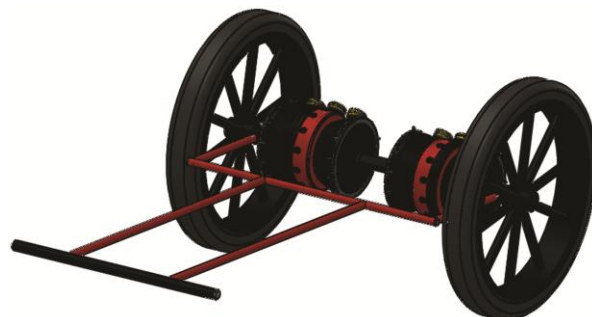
CAD of developed paddy drum seeder-cum-fertilizer applicator.
